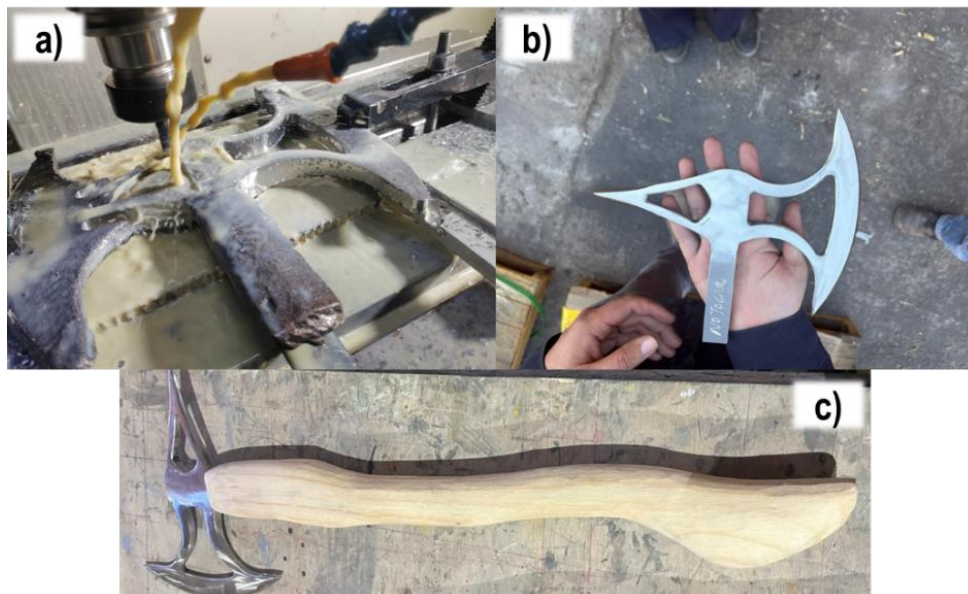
Steps in machining the blade and manufacturing the handle: a) 2.5-axis blade machining; b) machined blade with a preliminary edge; c) preliminary shape of the handle assembled to the blade.
